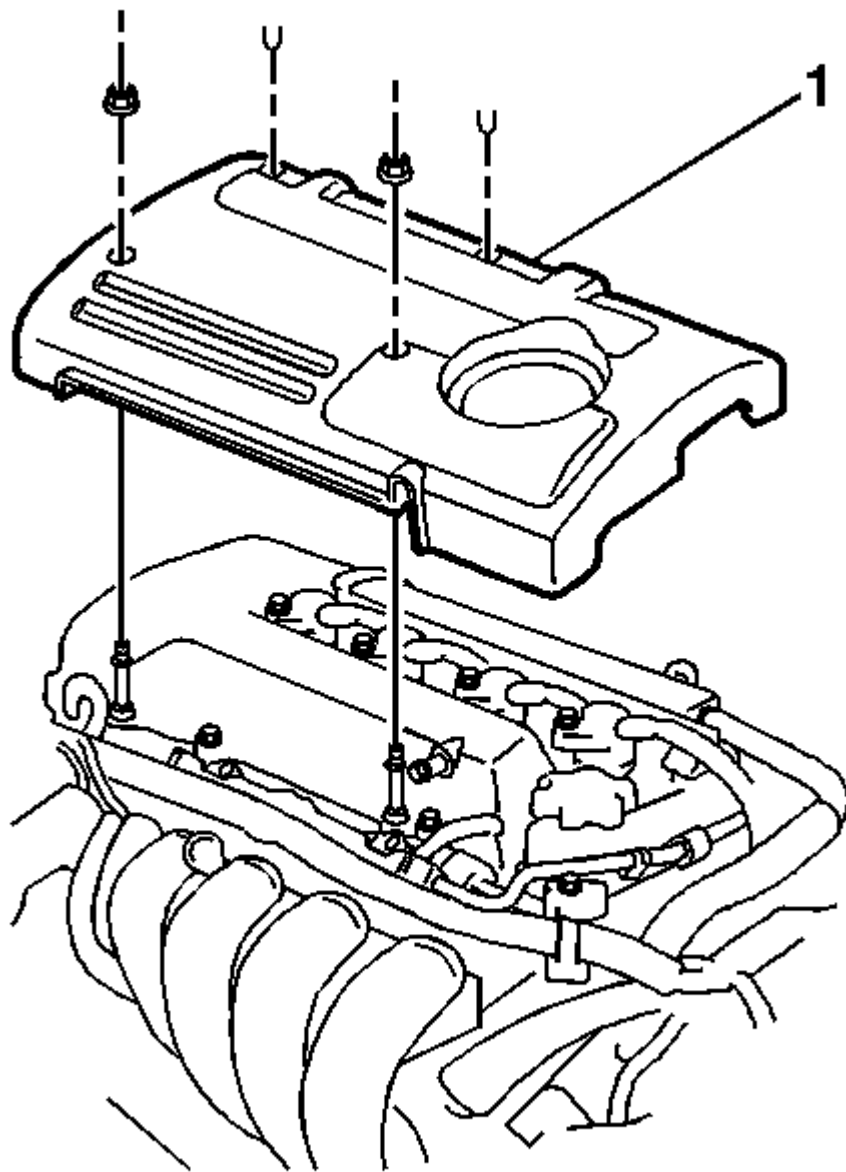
View Of Engine Top Cover, Plastic Retainers & Fasteners
